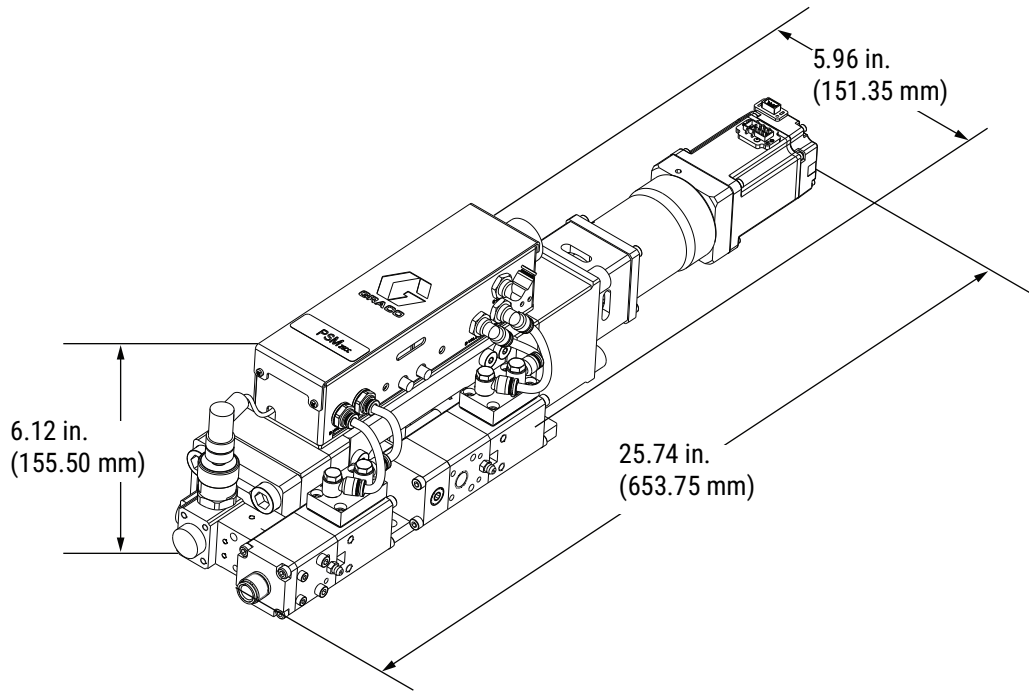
PSM Ambient Metering Unit Dimensions, 50cc
